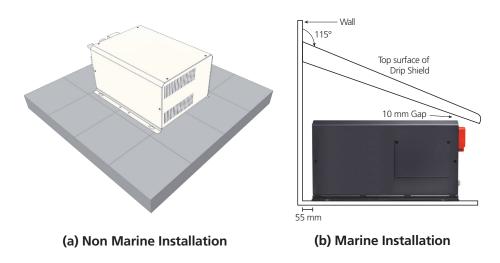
Mounting Arrangement: Horizontally On Horizontal Surface
